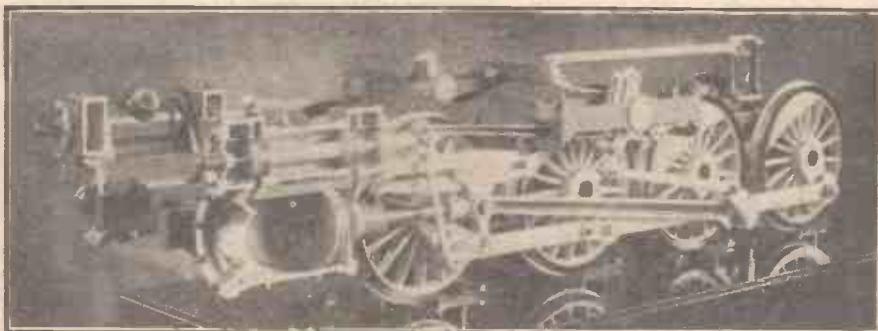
A three-quarter front view of a Walschaerts gear model showing both cylinders.
